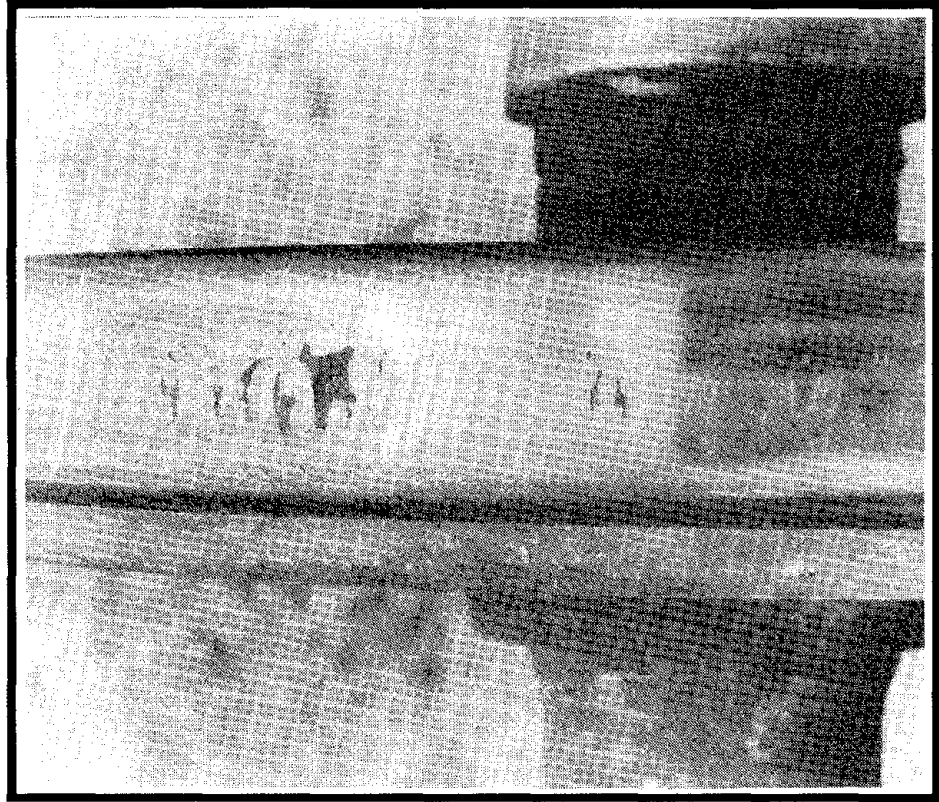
Shelled Wheel Tread Defect -- Left Wheel
